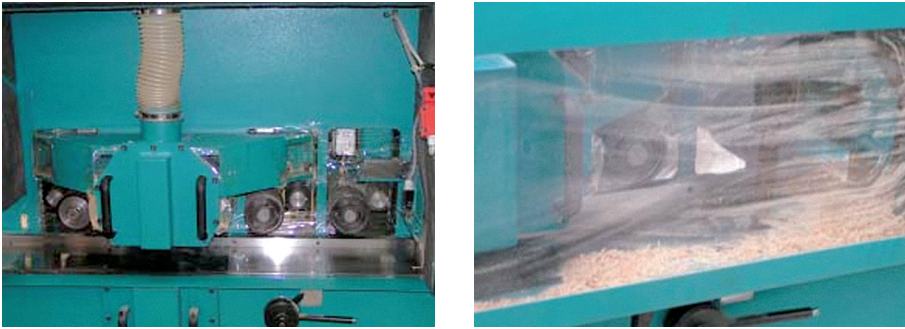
Sealed working space of the milling machine and chips and dust before collection
